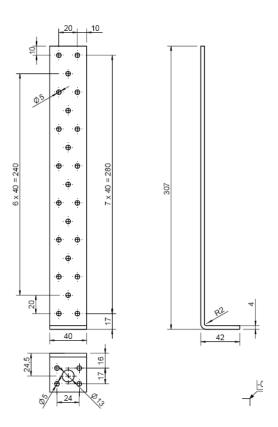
Dimensions of Timber-concrete steel anchor 40 x 200 x 4.00
